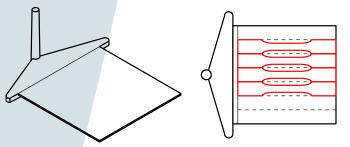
Injection molded part and tensile bars / department of mechanical engineering
